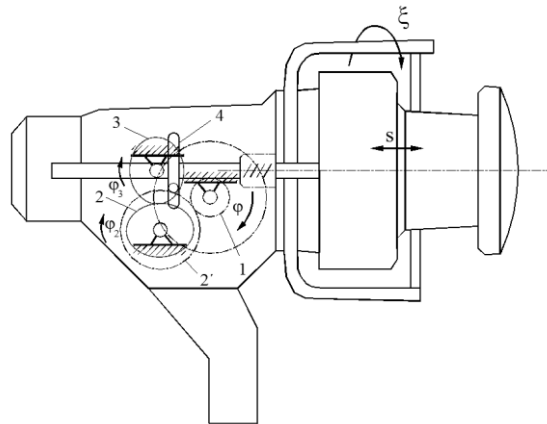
Kinematic schema of the fishing reel with noncircular gear mechanism in series with a scotch-yoke
